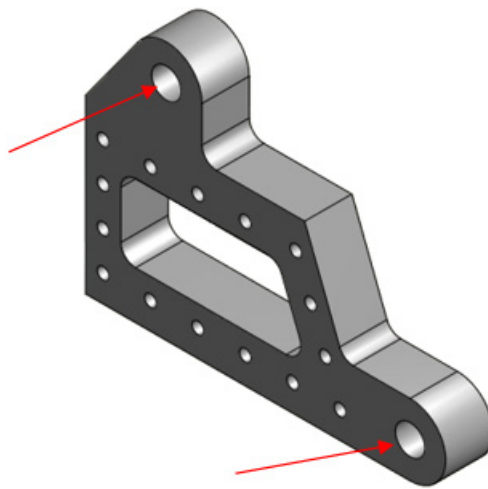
10000 STRUT REPAIR FITTING 13A01085-001
